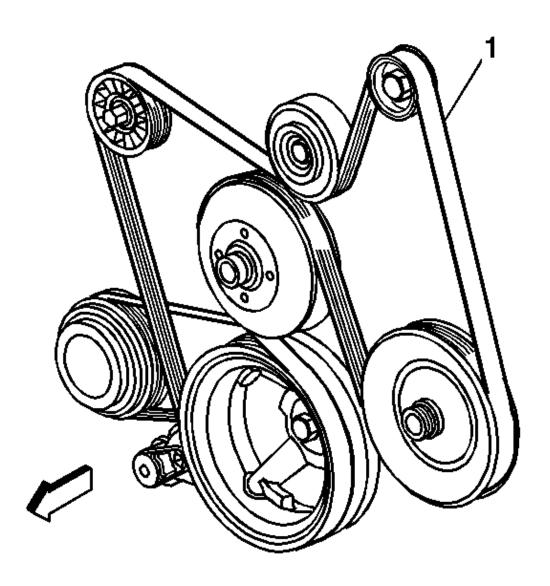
View Of Accessory Drive Belt Routing Courtesy of GENERAL MOTORS CORP.
